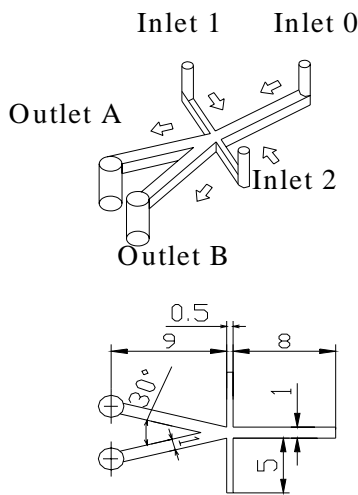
Test Section of Mini/Micro-Size Y-Type Fluidic Device
